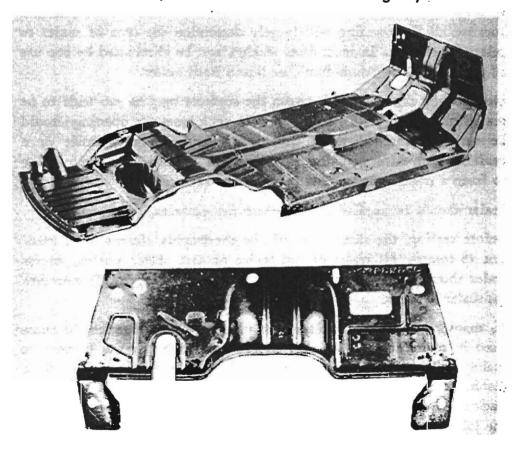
The Dash Panel Is Welded to the Floor Pan. Dash Braces Are Welded to Dash Panel and Cowl Side Panel.
